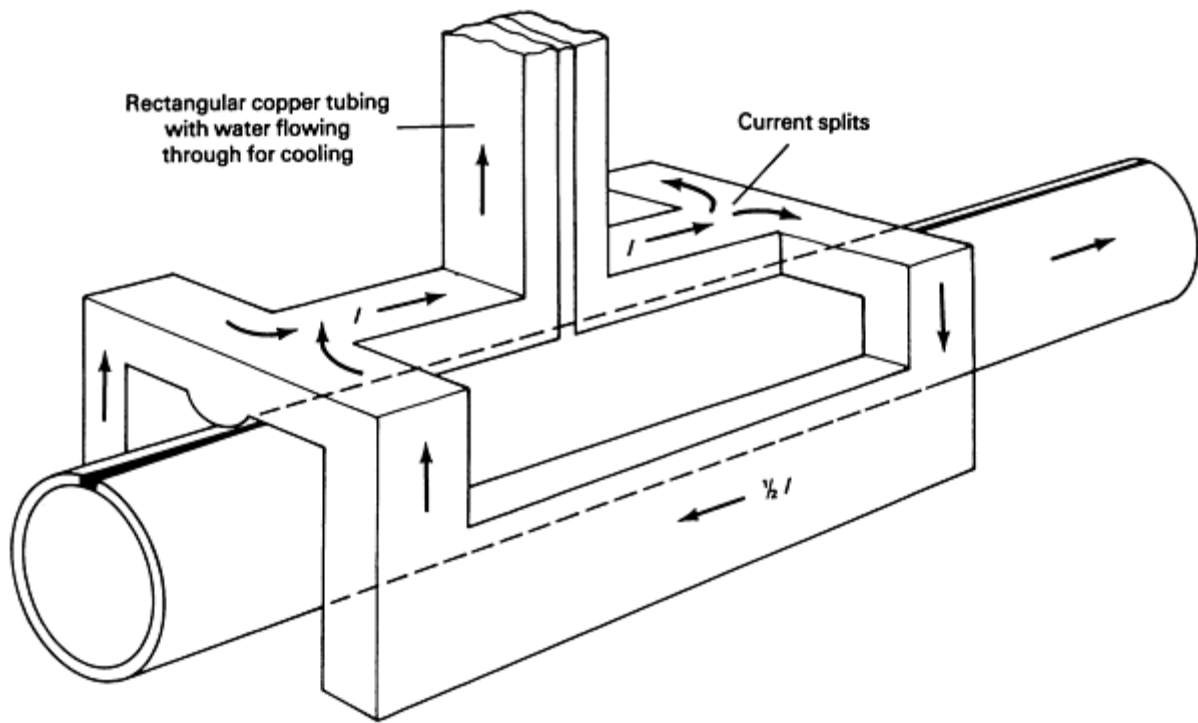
Split-return coil for annealing of seam welds in pipe or tubing
